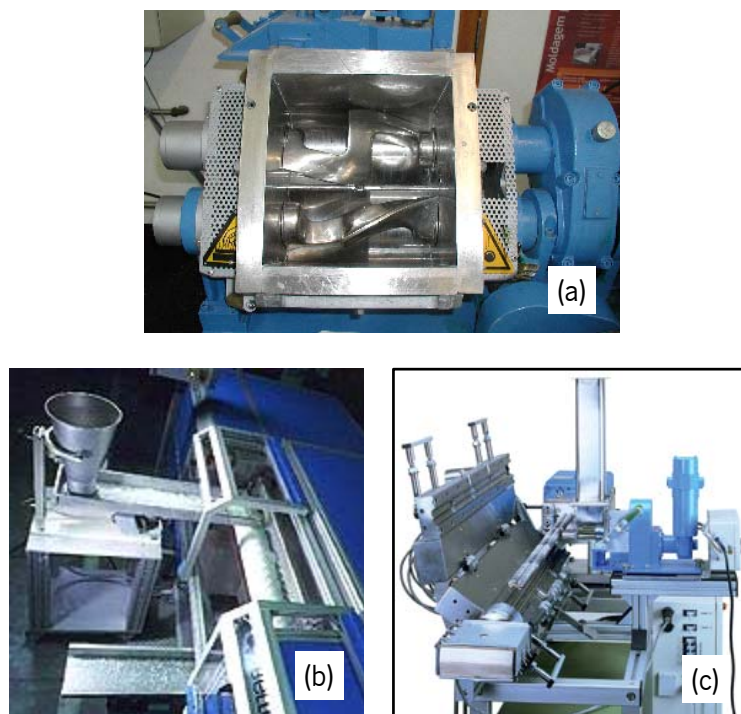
Typical feedstock compounding equipments: (a) z-blade mixer, (b) shear roll compounder and (c) twin screw extruder.
